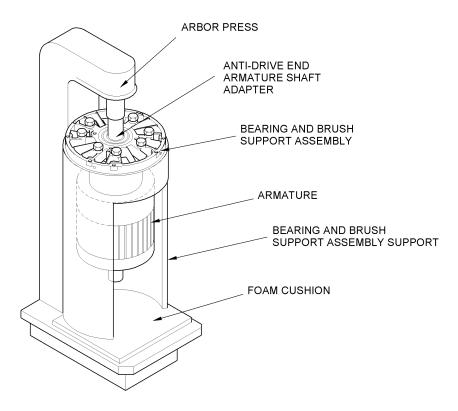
Remove the Armature from the Bearing and Brush Support Assembly
